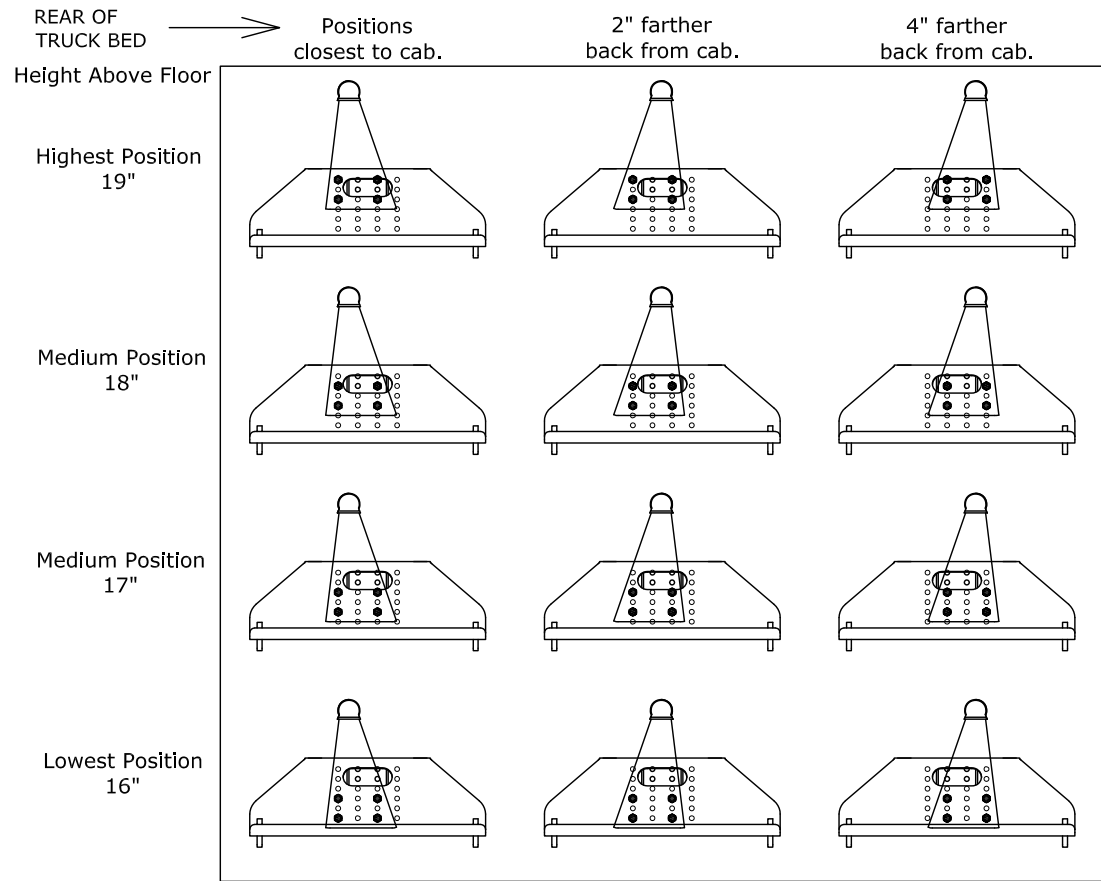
Side hole pattern as viewed from the driver's side.
